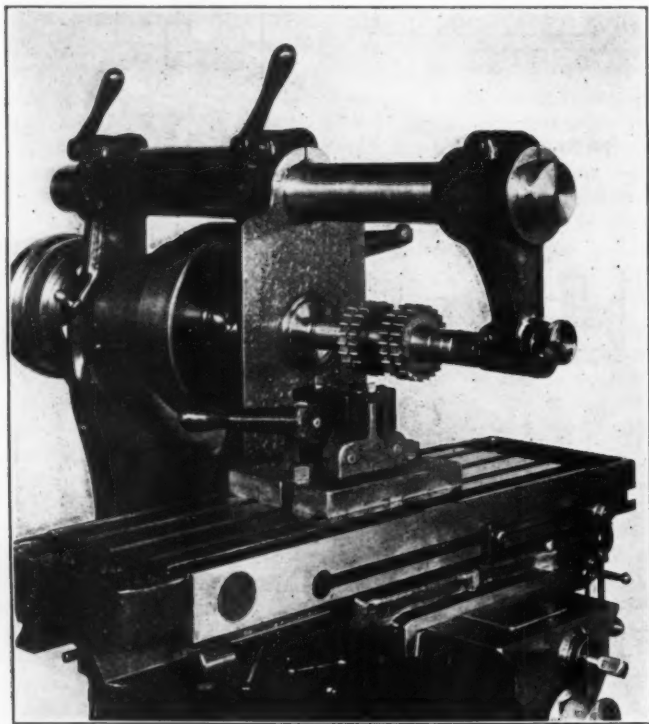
NO. 0 PLAIN MILLING MACHINE WITH SEMI-AUTOMATIC ATTACHMENT FOR USE IN QUANTITY PRODUCTION AND WITH FIXTURE FOR MILLING "ARGAFFES" FOUR AT A TIME
